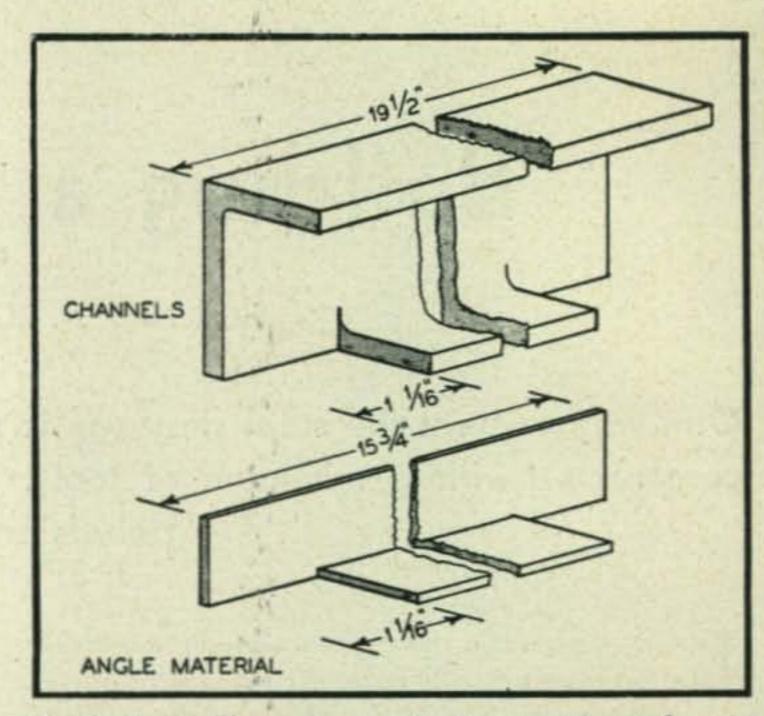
(top). Channels used for horizontal members at top and bottom of both front and back of rack. Cutout is made to permit angle material to mount front-to-rear angle member flush. (bottom). Front-to-rear angle member. Assembly of parts is shown in Figure 2.
